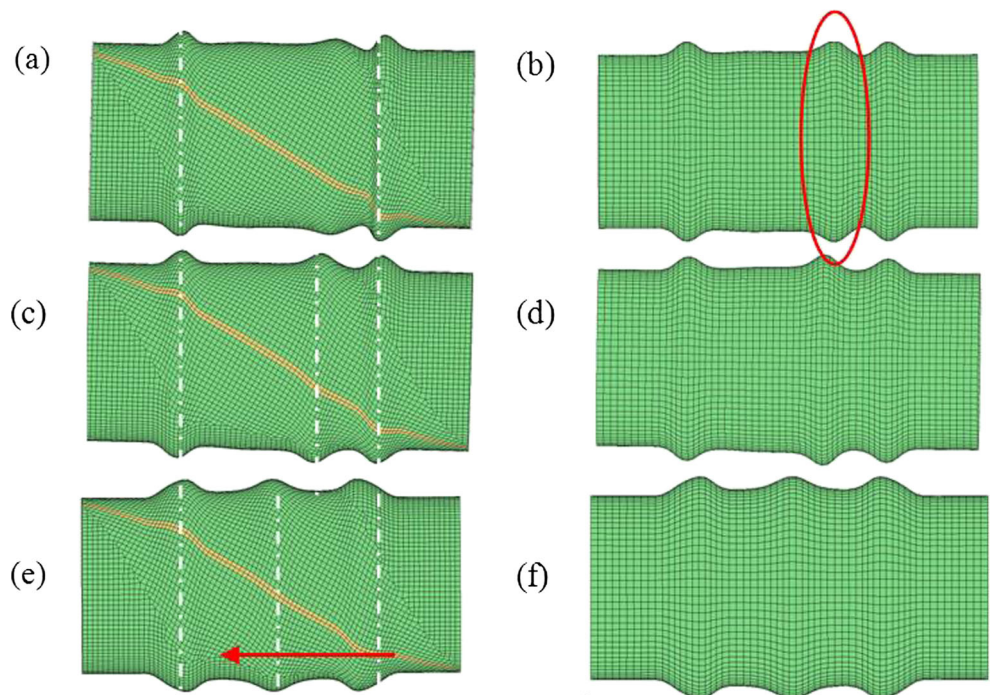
Wrinkle behavior for the welded tube during hydroforming: a 2.5 MPa, b 3 MPa, and c 4.5 MPa
